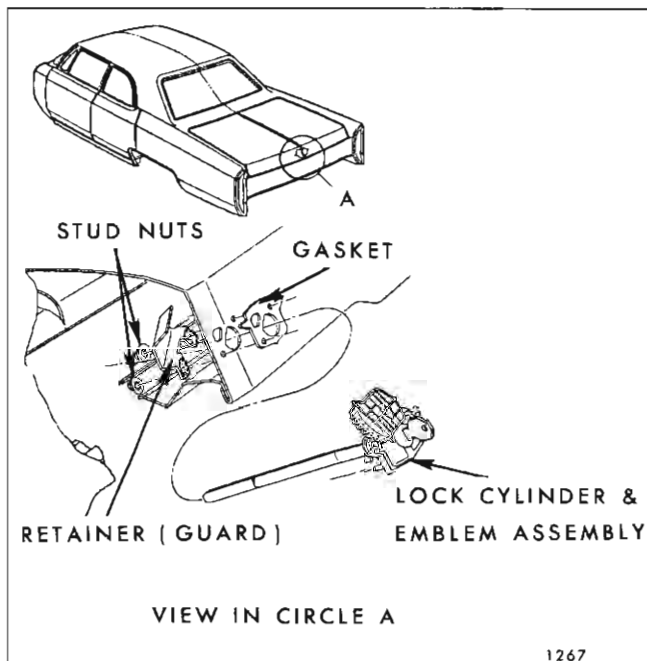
F9—Rear Compartment Lid Lock and Emblem Assembly
